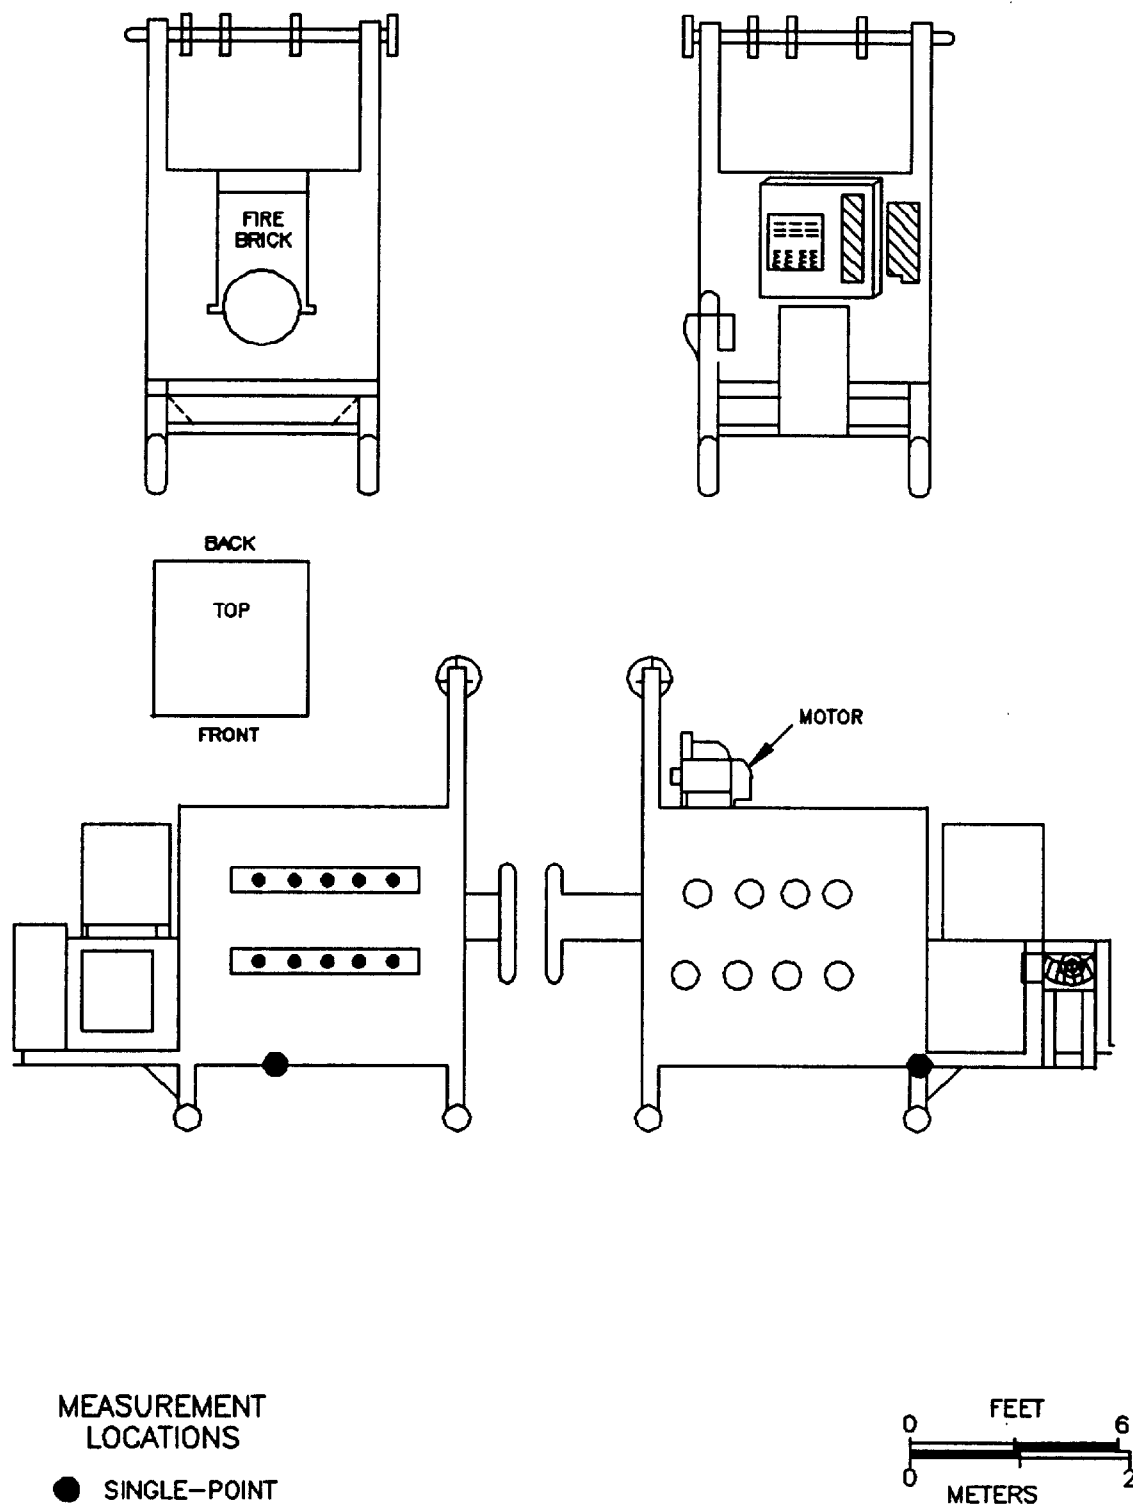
Building 30, Fabrication Room, Furnace #38308 – Measurement Locations
